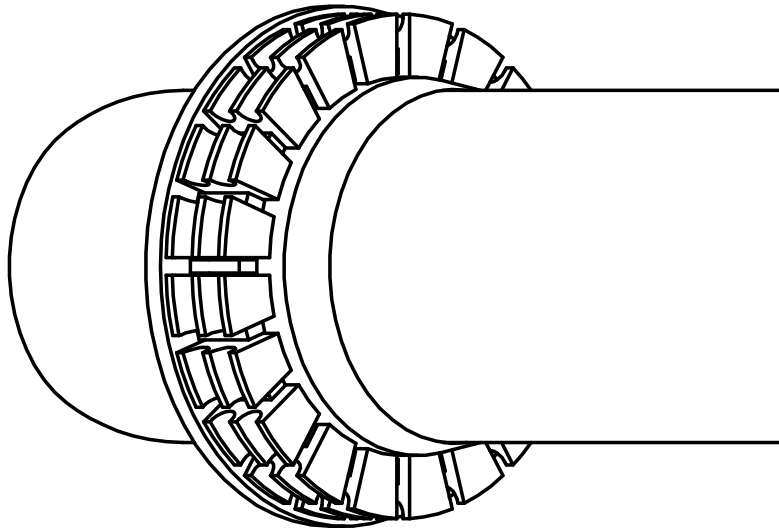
The mounting device with the assembled ring on a rod. The garter springs are not depicted.
